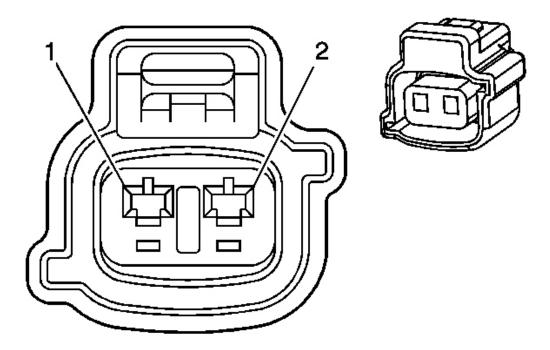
Door Lock Actuator Connector End Views Courtesy of GENERAL MOTORS CORP.
